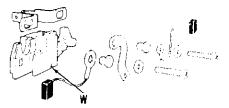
Exploded view of brush holder assembly. Insert wire in hole (W) to hold brushes up. Refer to text.
